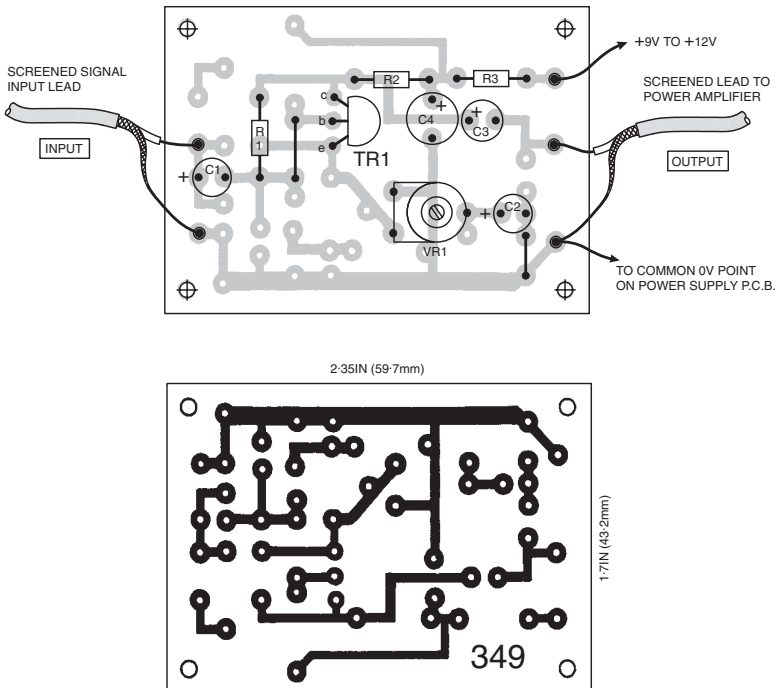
Medium Input Impedance Preamplifier printed circuit board component layout, wiring and full-size copper foil master.
